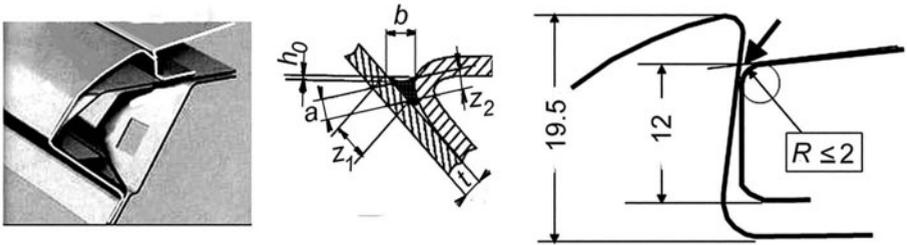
Examples of roof sections designed for laser braze welding.
